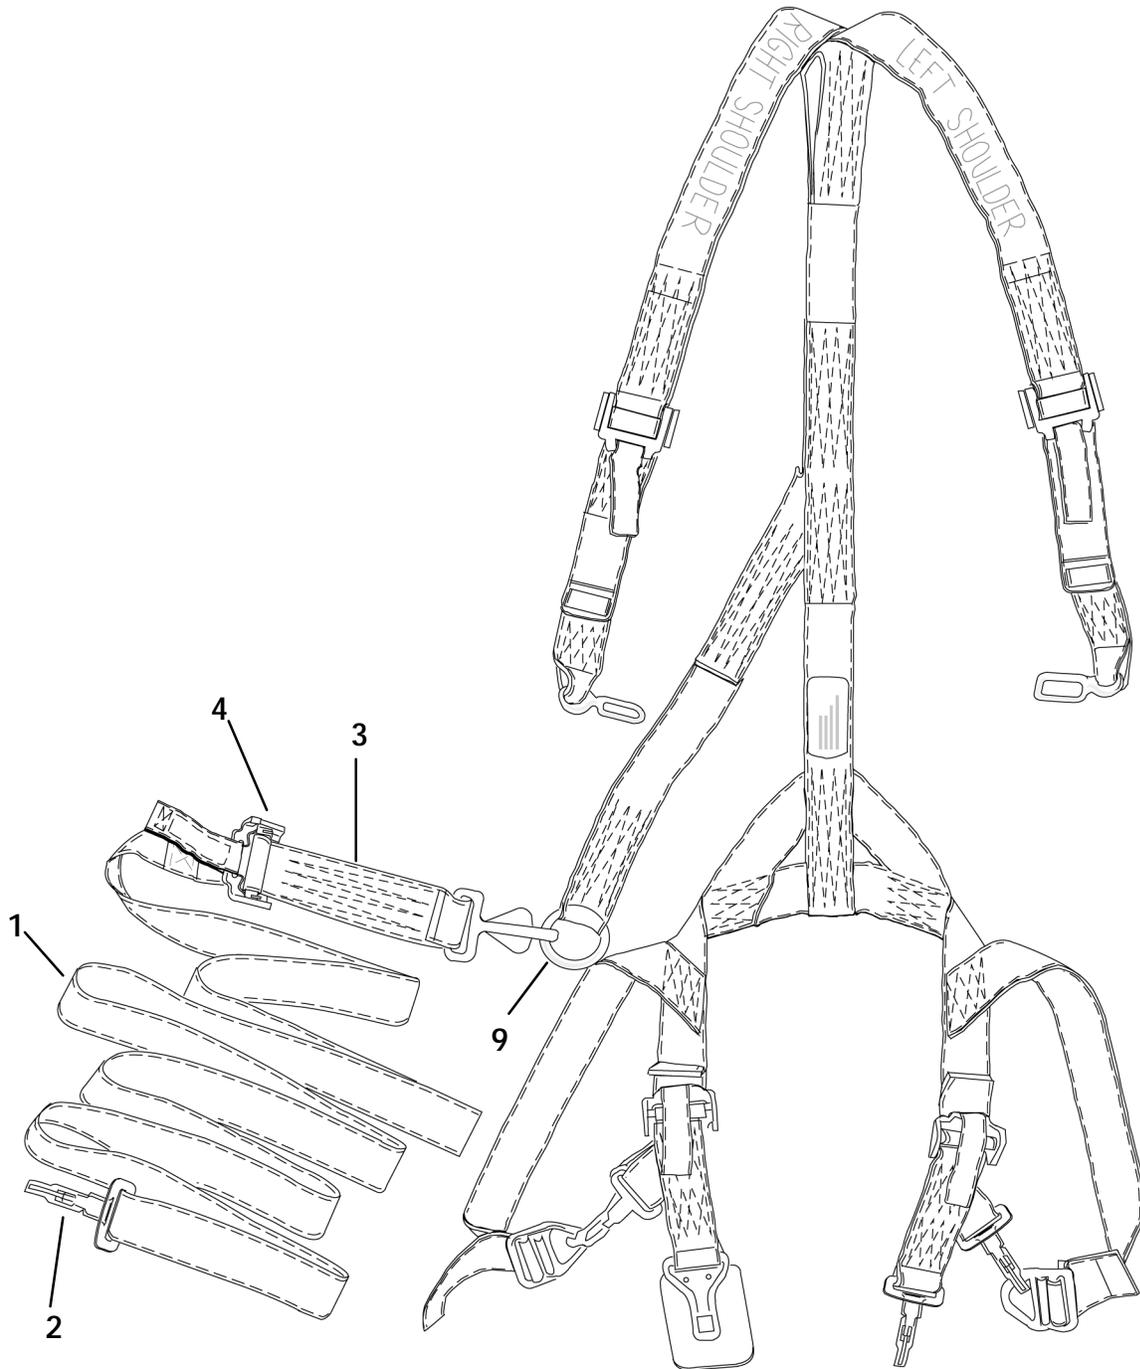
Aircraft Safety Harness Assembly (Sheet 1 of 3)
